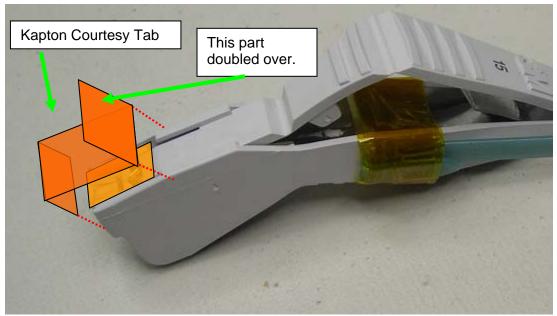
Stapler with Teflon Tape showing location of Kapton Courtesy Tab.
